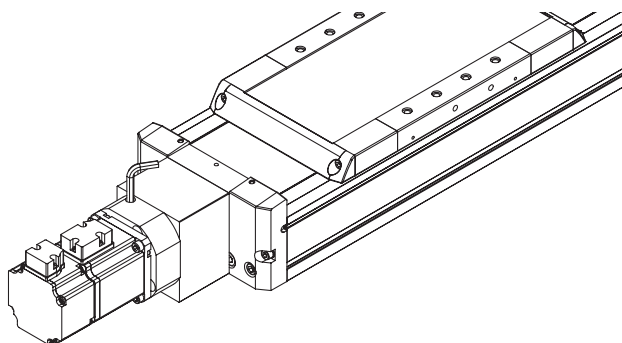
Tightening the clamping hub on the motor shaft
